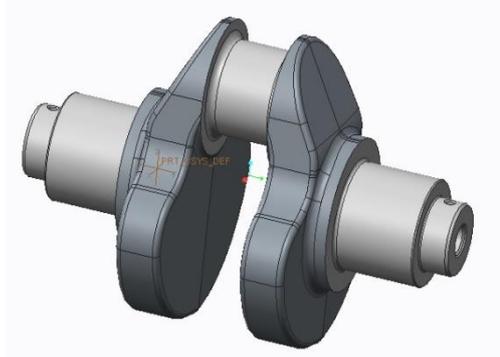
Three Dimensional Modeling Original Crakshaft in Creo 2.0
